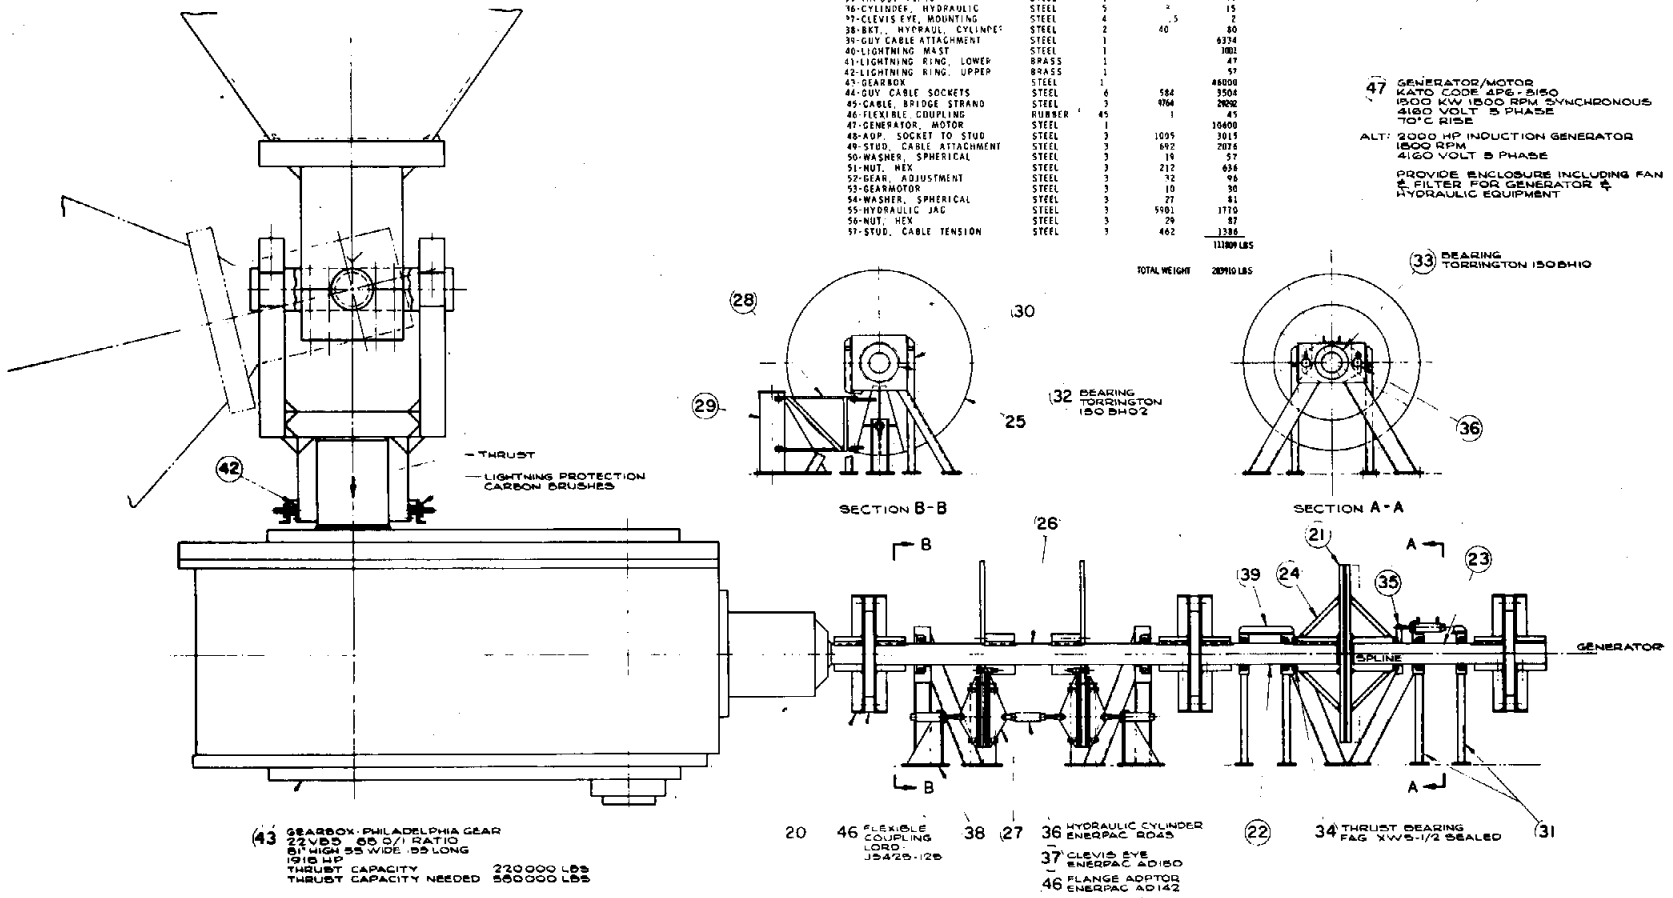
1600-kW VAWT, Hydraulic Clutch
